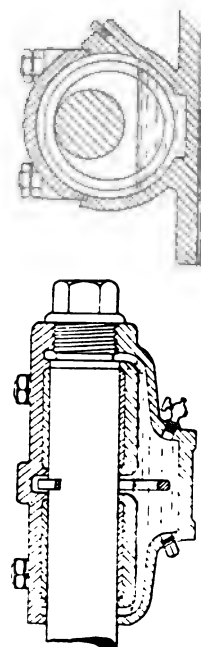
Ring Oiling Bearing, Babbitt lined.
